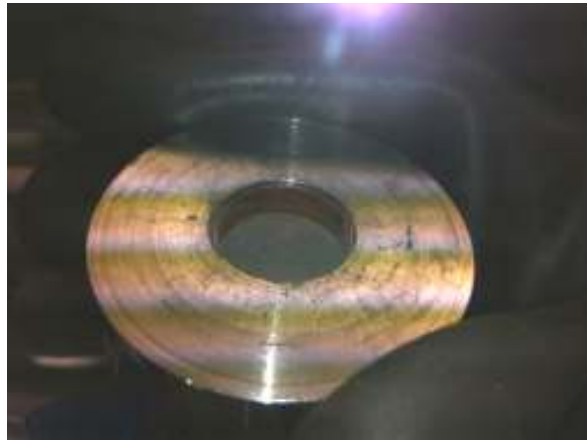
An extrusion canister being packed with uranium powder mixture.
